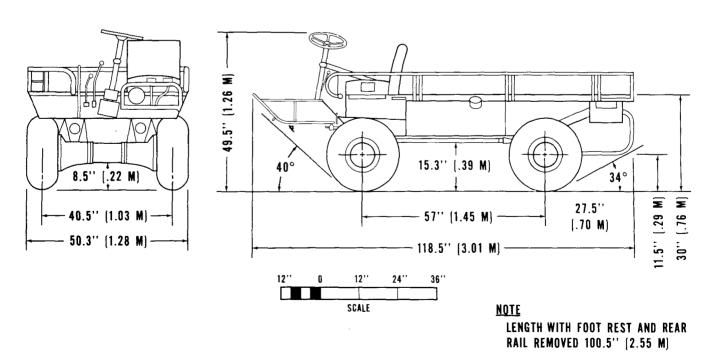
Side and end elevations of truck, ½-ton, guided missile equipment, TOW.
